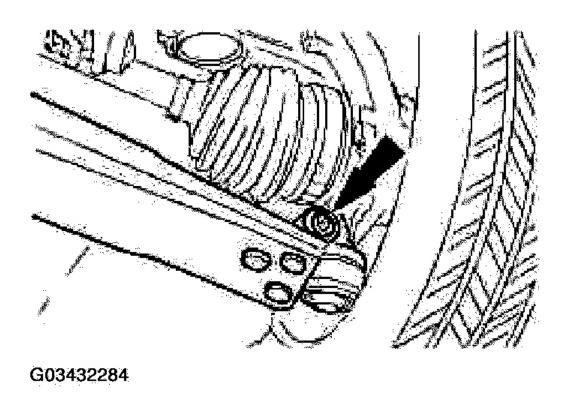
Removing Suspension Arms Courtesy of FORD MOTOR CO.
